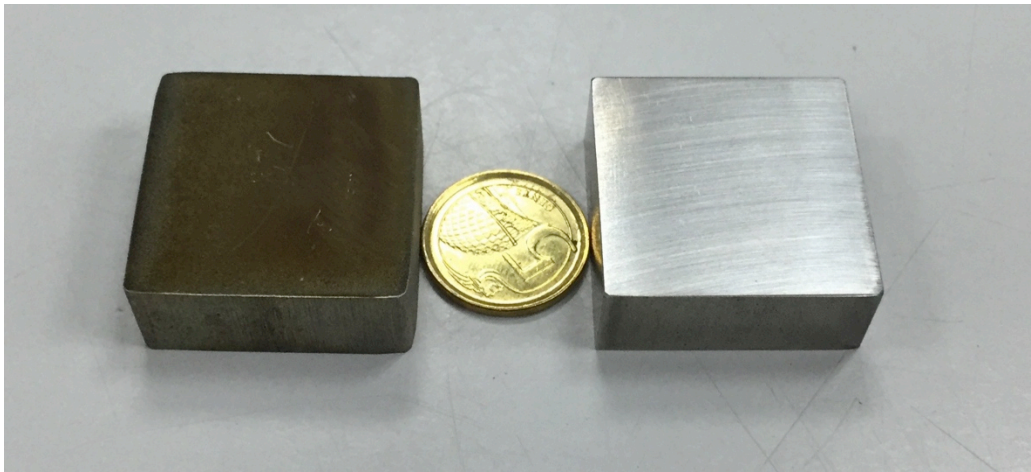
SUS316 workpieces after wire EDM (left) and after sandpapering to remove oxide layer (right).
